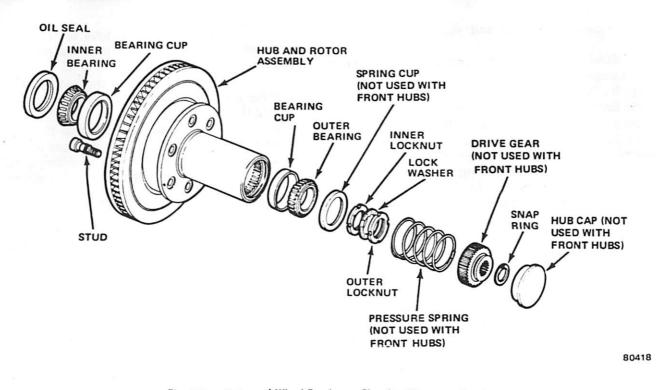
H-9 Rotor and Wheel Bearings-Cherokee-Wagoneer-Truck
